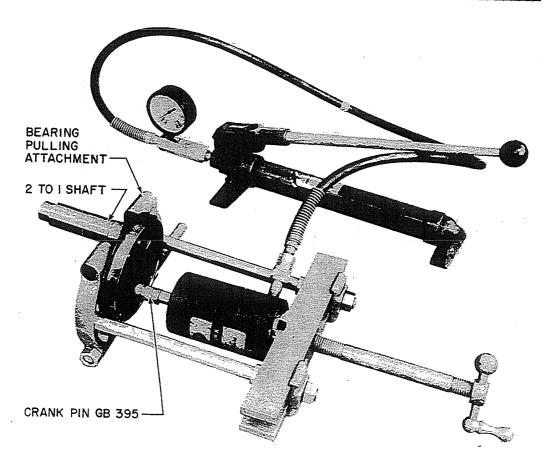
2 to 1 Shaft, Removal of Crank Pin GB395
